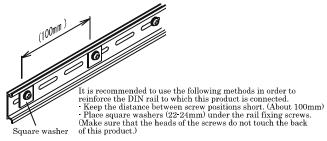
Mounting on a DIN Rail Installation Metal Fittings
